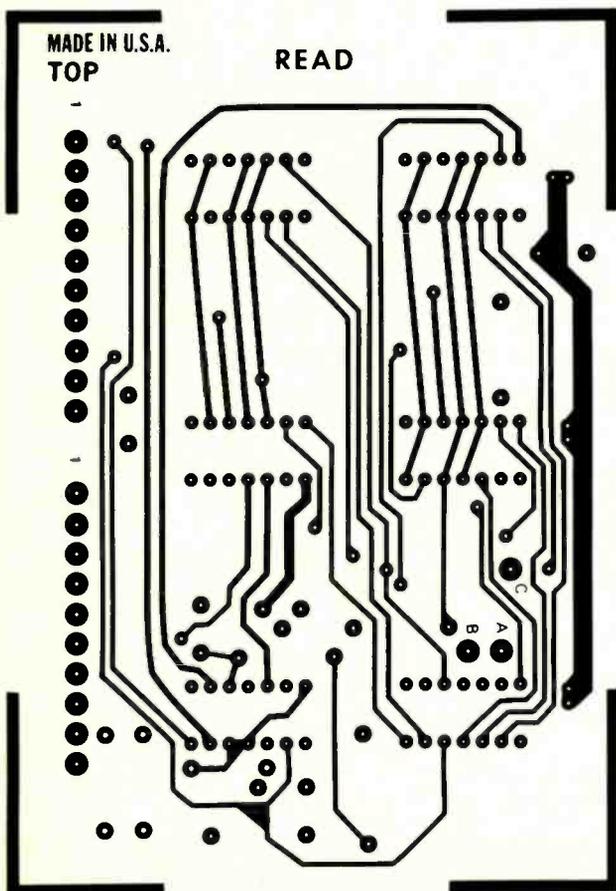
FOIL PATTERN for component side of double-sided board shown full size.
